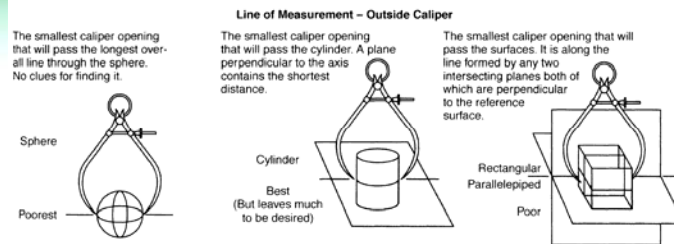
Seek the smallest caliper opening that will pass the part.
